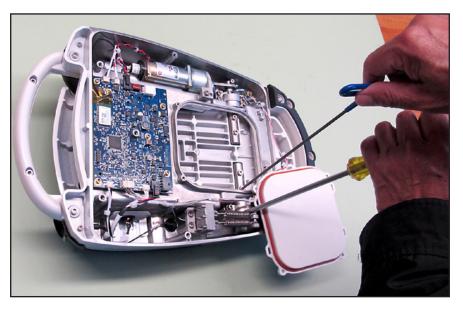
Removing the Treadle from the Spring-Loaded Shaft
